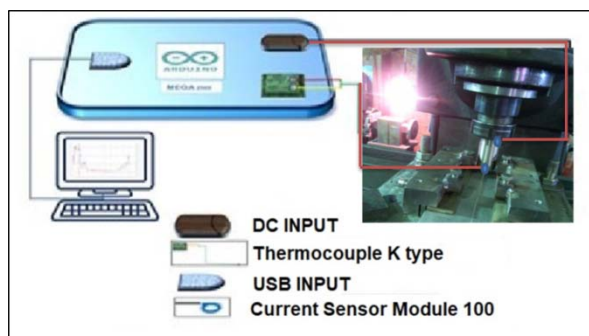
Scheme of friction weld overall approach used in monitoring and controlling friction stir welding
